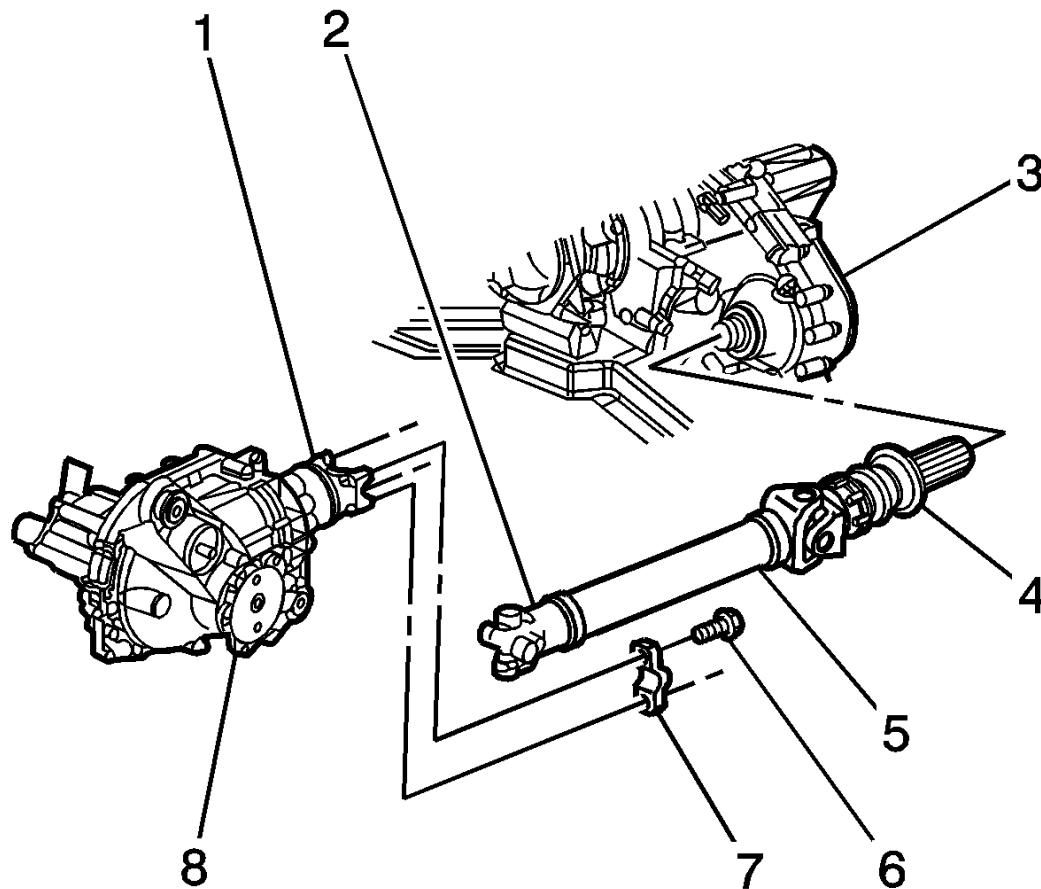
Installing Propeller Shaft To Front Axle Pinion Yoke
